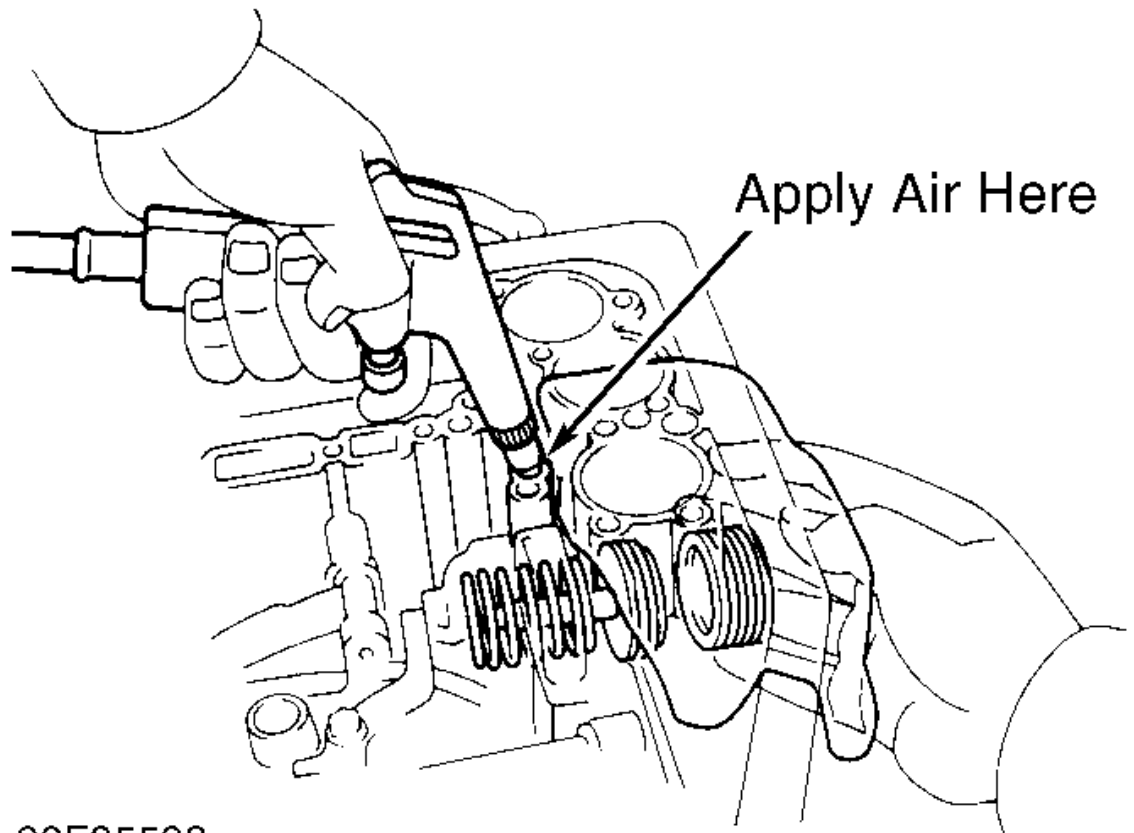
Checking 2nd Coast Brake Piston Stroke
